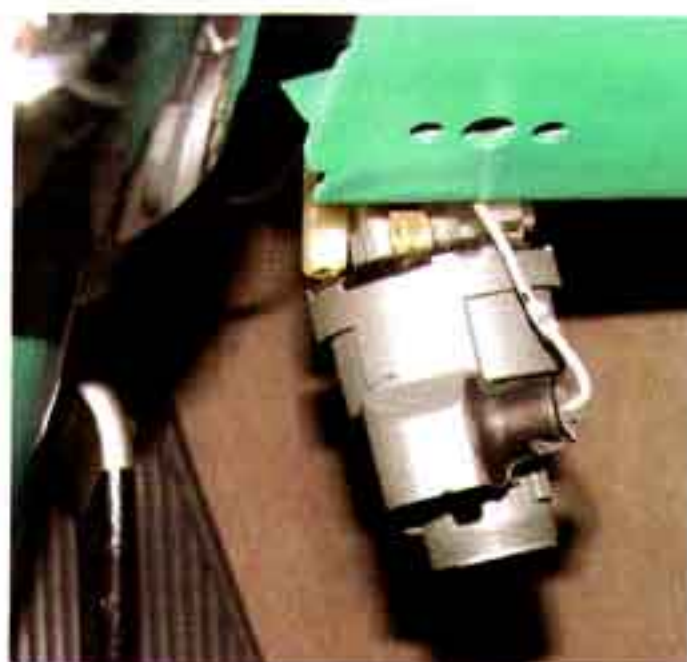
& 18b: Using an ignition switch spanner nut tool #49-12 unscrew the spanner nut from the ignition switch, this will allow the switch to drop down from the dash board.
